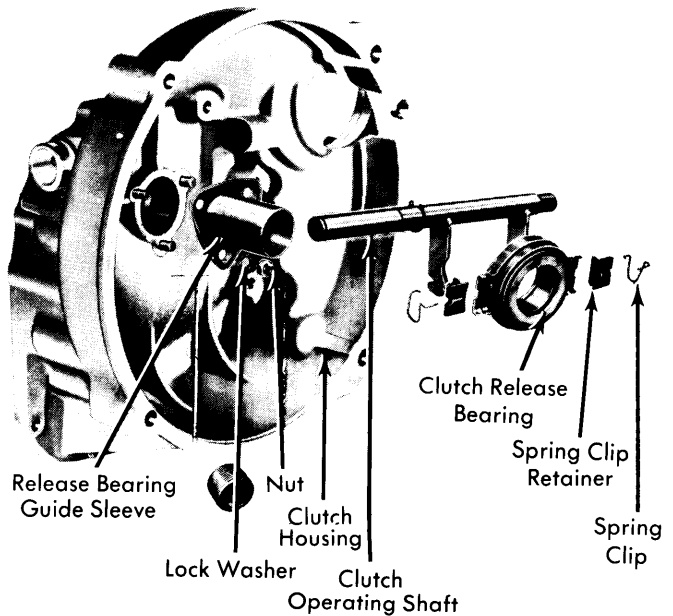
Clutch Release Bearing Assembly (Type 2 Shown)
